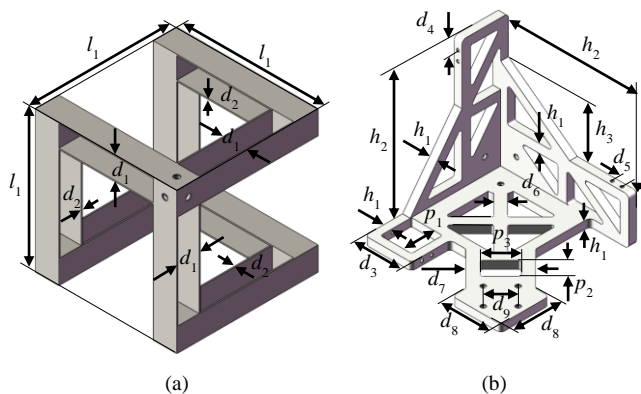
Dimensions of the parts of the three-axis force sensor: (a) XYZ compliant parallel mechanism, (b) Base.
